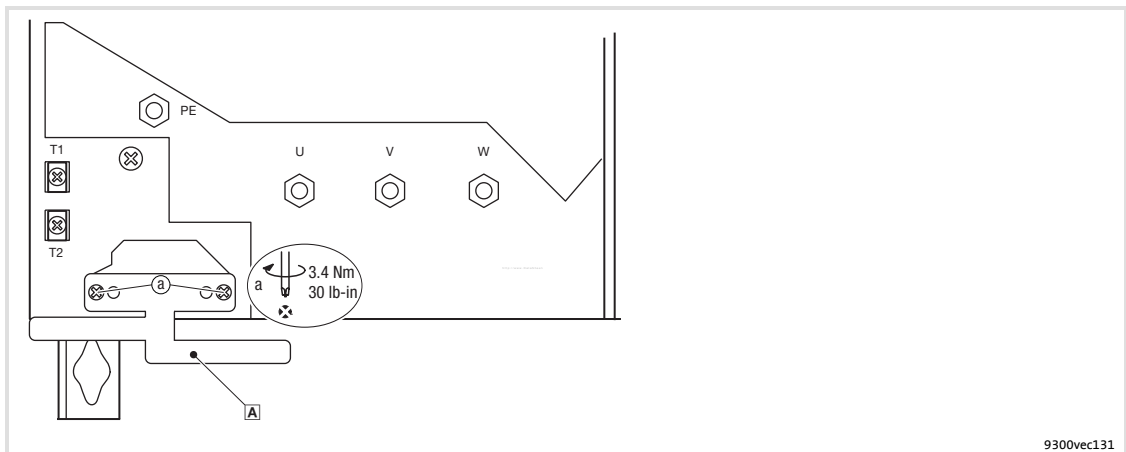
Installation of shield sheet for drive controllers 15 ... 30 kW
